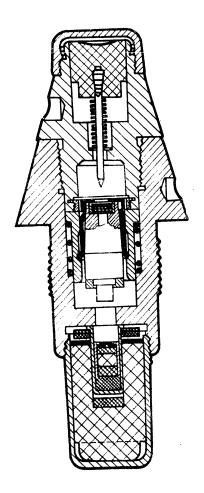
FUZE PD »KTM-1« DESIGNED FOR HIH EXPLOSIVE SHELL »HE-OF-350«
